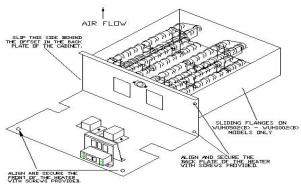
HEATER ASSEMBLY INSTALLATION
